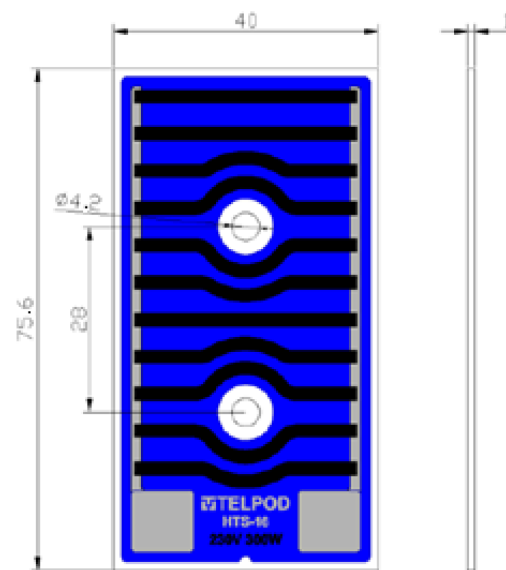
Telpod HTS-16-230-300-3/6.3 thick film heating element dimensions expressed in mm.
